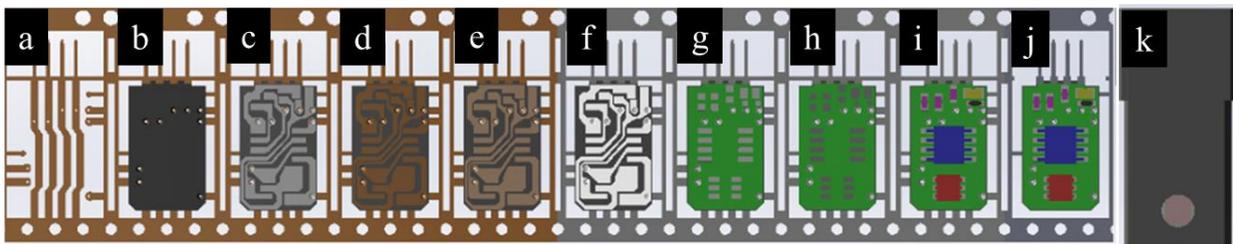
ASEP manufacturing process from stamping to reflow. The process is continuous and requires roughly half as many process steps as conventional PCB manufacturing.
